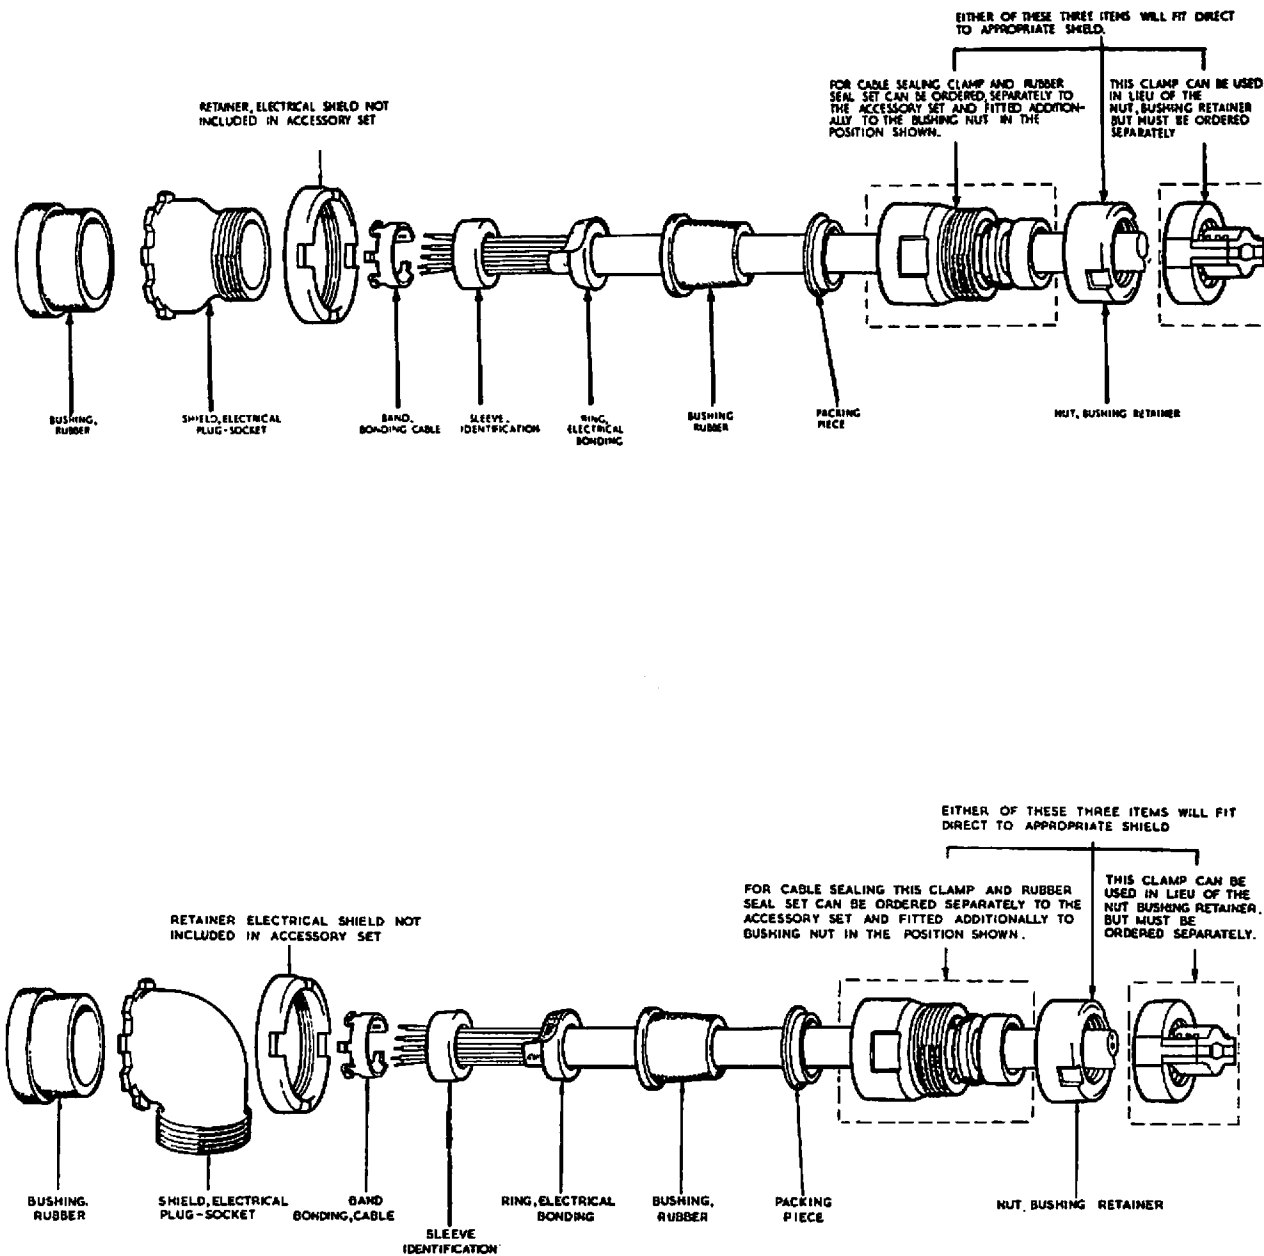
Pattern 104 - Terminating cables DEF STAN types C, J and R
